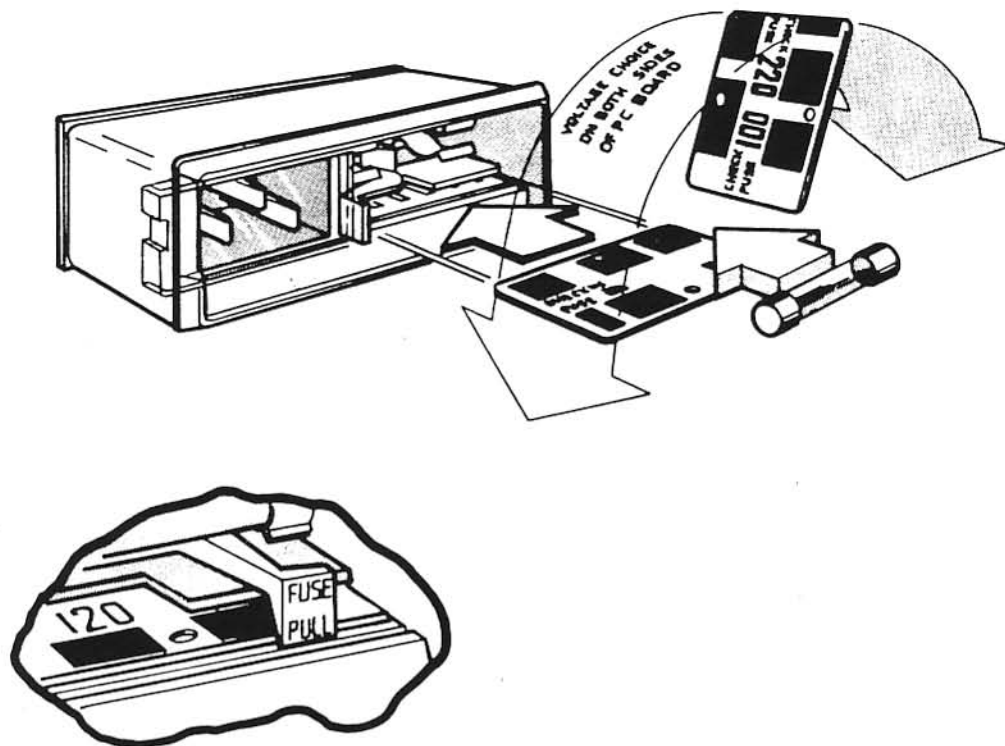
AC-INPUT RECEPTACLE AND FUSE ASSEMBLY
